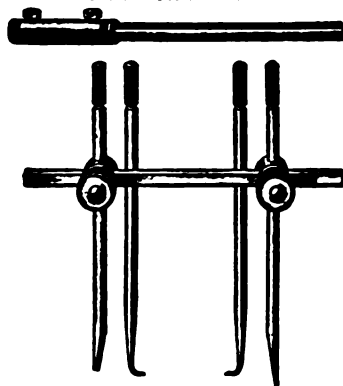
Extension Beam Trammels. FIG. 2642.
